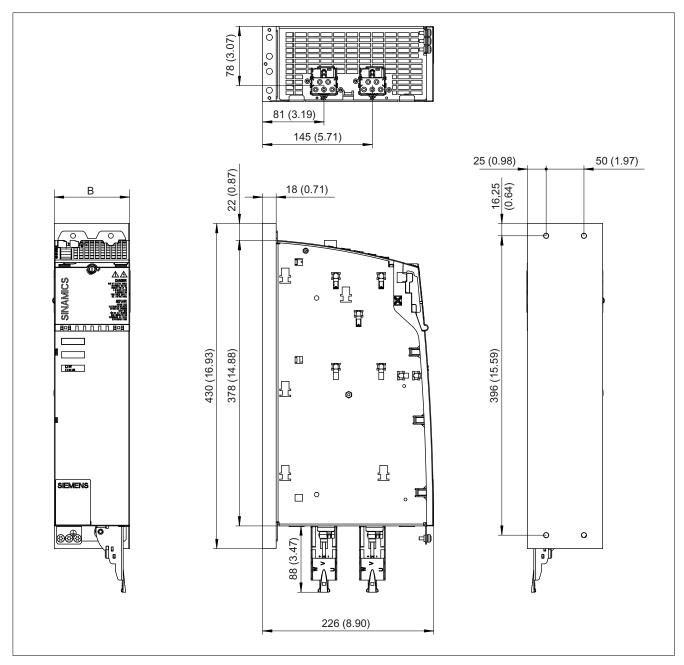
Dimension drawing of 30 A and 2 x 18 A Motor Modules Booksize with cold plate, all dimensions in mm and (inches)
